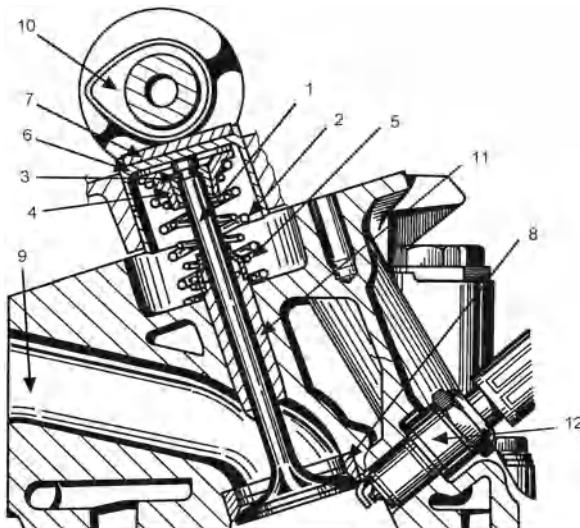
Direct drive valve configuration, in which a single camshaft operates directly the exhaust and intake valves through bucket-type tappets (courtesy of FIAT)
